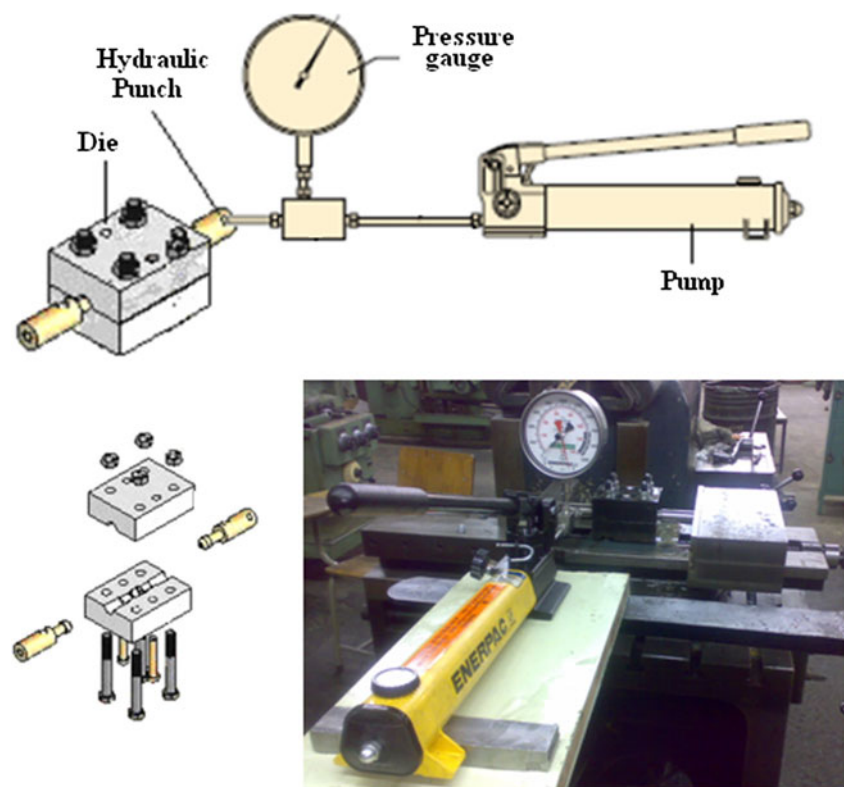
Experimental test setup and the tube hydroforming die (enlarged view)
